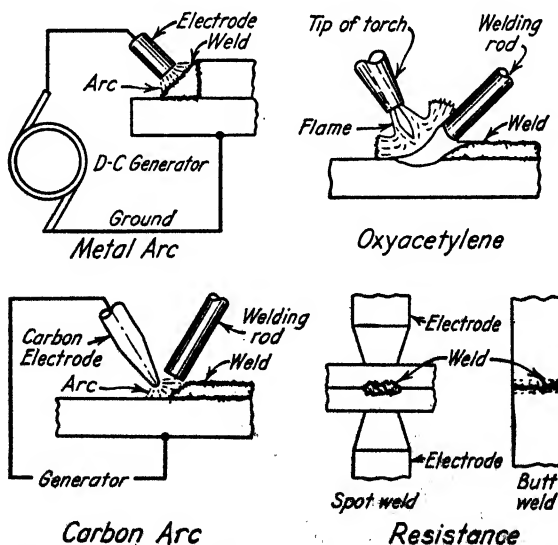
Welding processes. From H. Malcolm Priest, *Practical Design of Welded Steel Structures*, American Welding Society.
